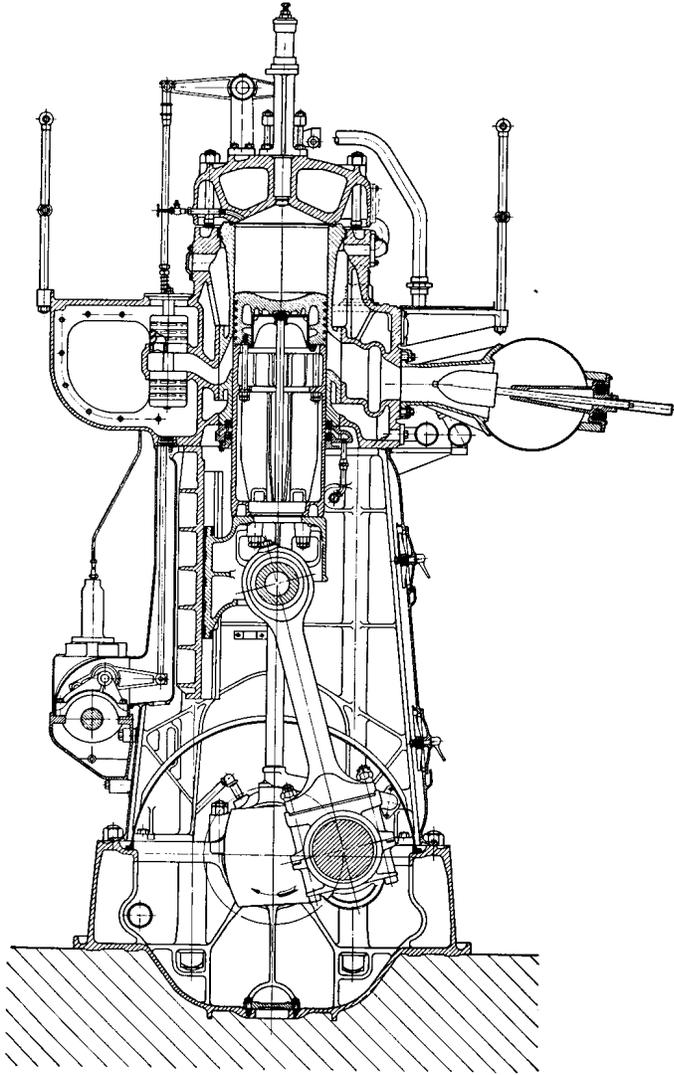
Nordberg Reciprocating Blower Scavenged Engine with Sulzer Type Supercharge Valve (Crosshead Type). 21 in. bore 31 in. stroke, 225 rpm.
